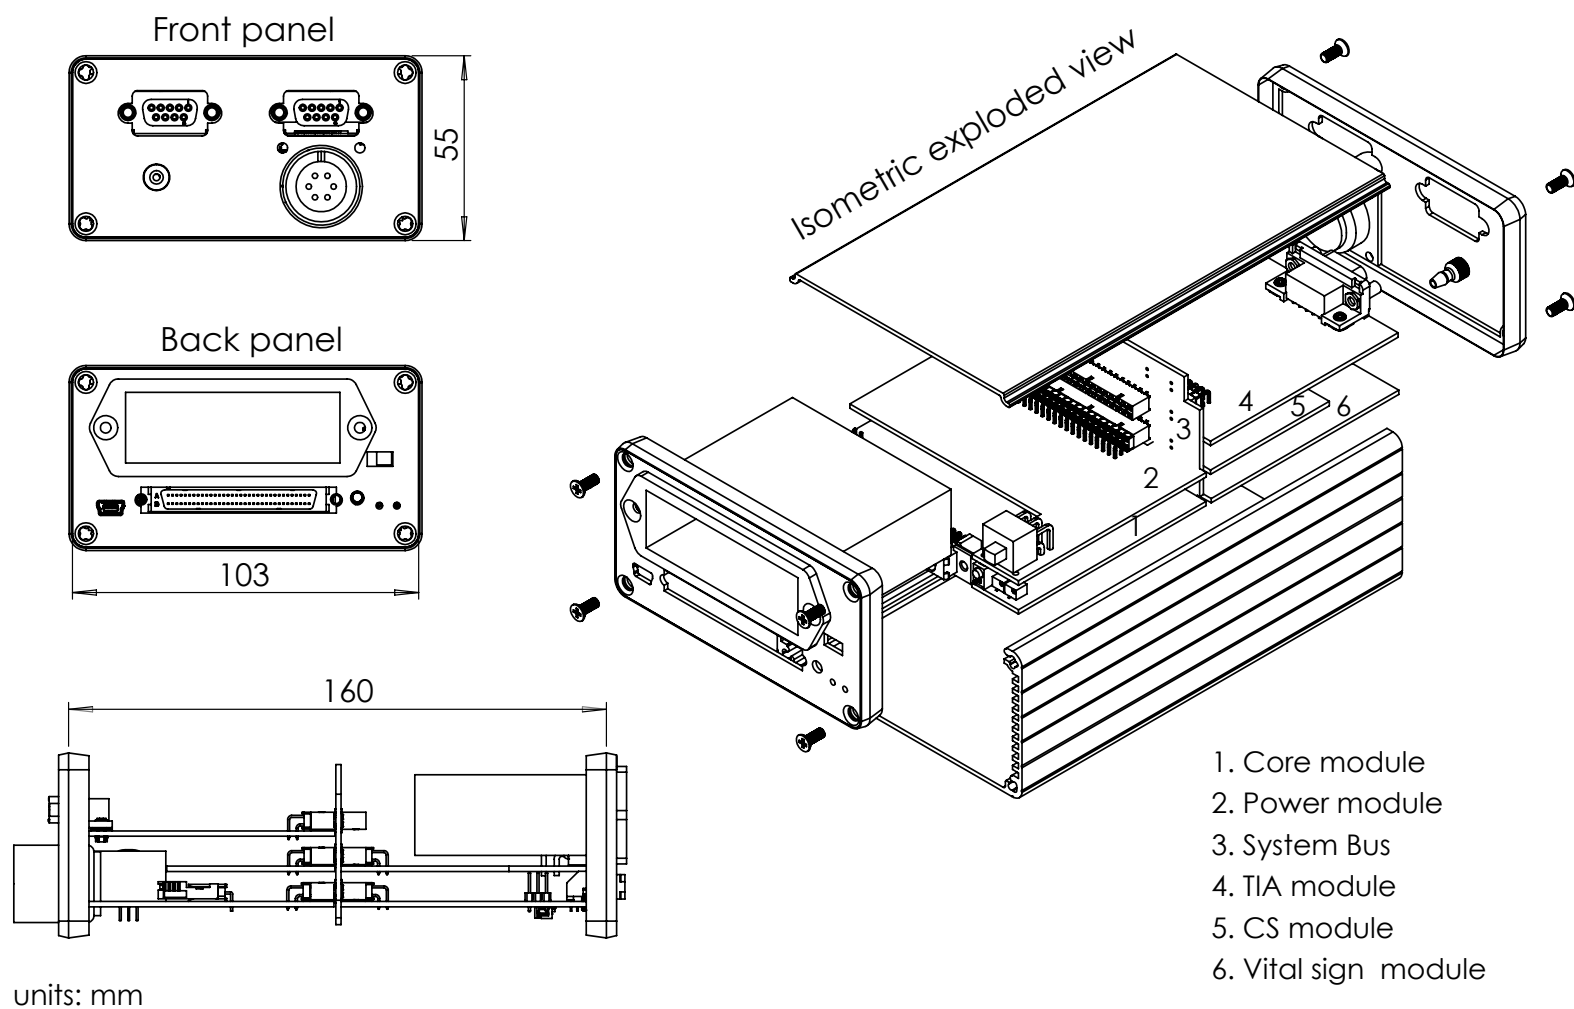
3D mechanical diagrams showing the front panel, back panels, and the exploded isometric view of the system's assembly.
